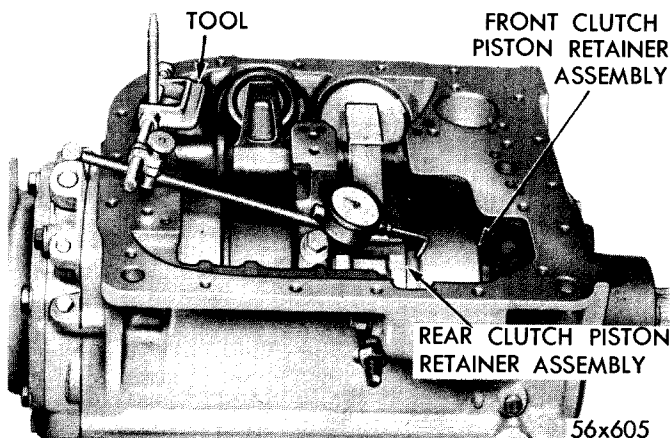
Checking Front Clutch Piston Retainer Assembly End Clearance
